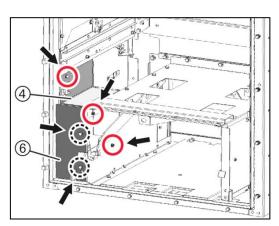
5 bolted joints on wiring duct cover, panel width 1000 mm
